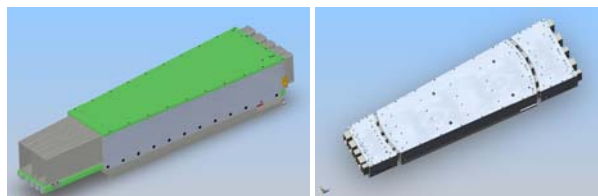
Guide cassettes for the in-pile plug assembly and the primary shutter
